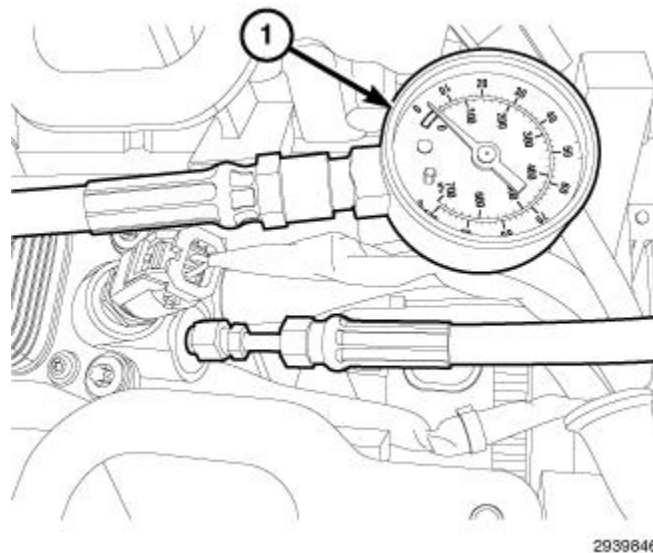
Pressure Gauge Installed To Oil Pressure Port
